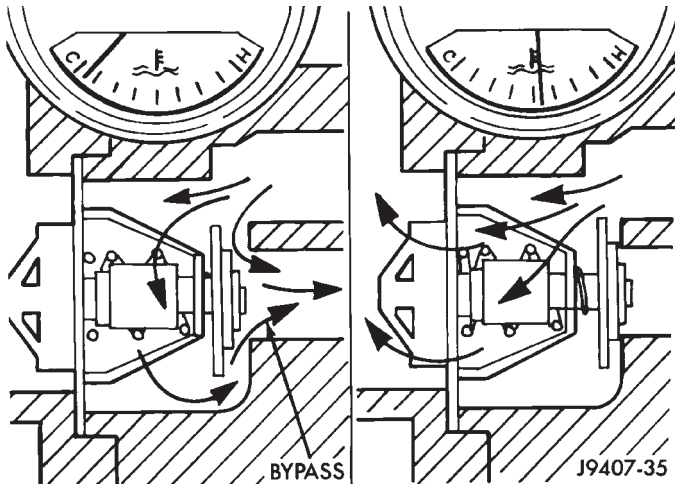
Thermostat Operation—5.9L Diesel—Typical
